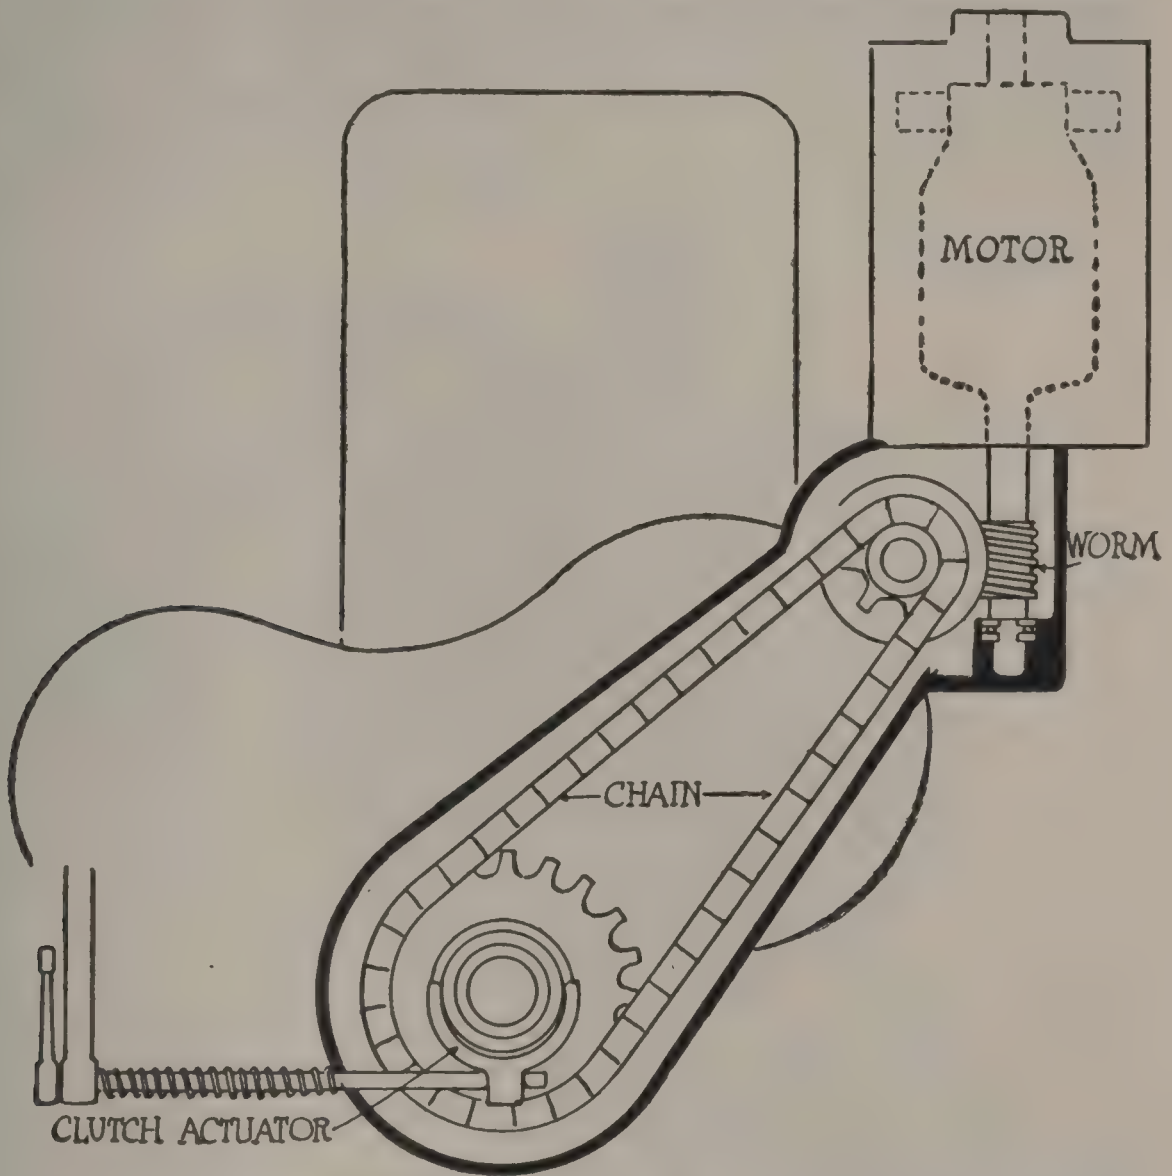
The motor turns the sprocket through the worm-and-worm gear. When the engine runs away from the motor the clutch gives a clicking noise
